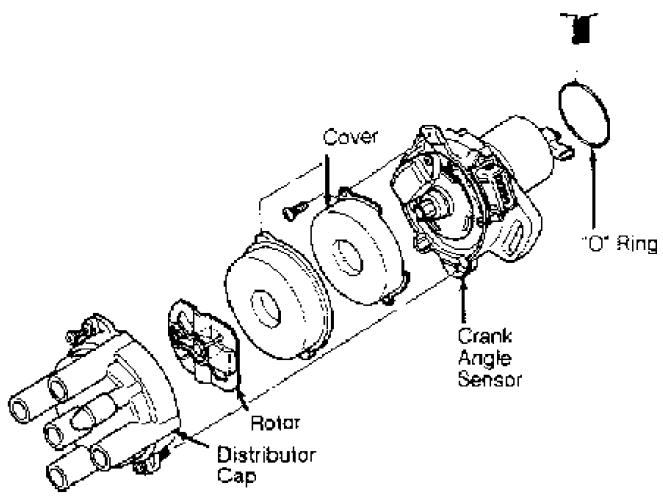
Exploded View of Distributor (Protege & 323) Courtesy of Mazda Motors Corp.
